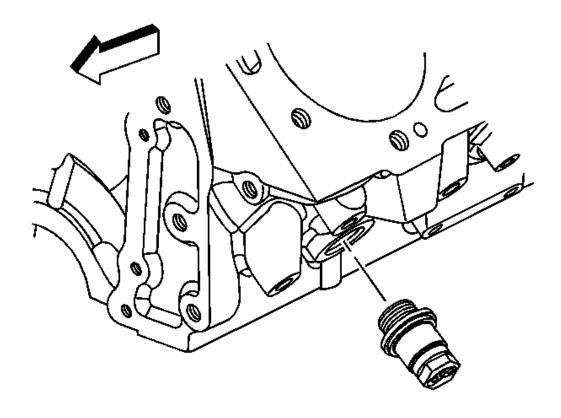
View Of Engine Block Coolant Heater Courtesy of GENERAL MOTORS CORP.
